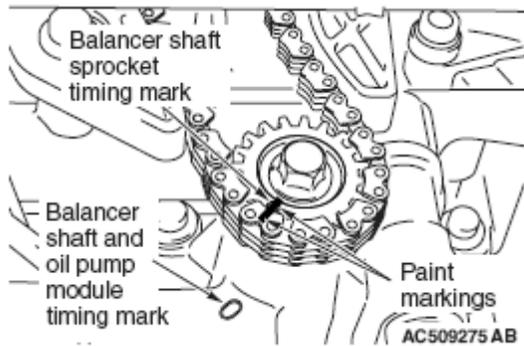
Identifying Balancer Shaft Sprocket Timing Mark And Balancer Timing Chain
